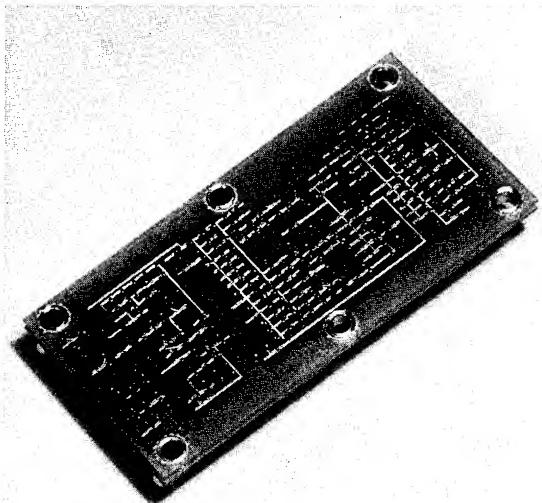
Parallel-gap welded printed circuit matrix.
